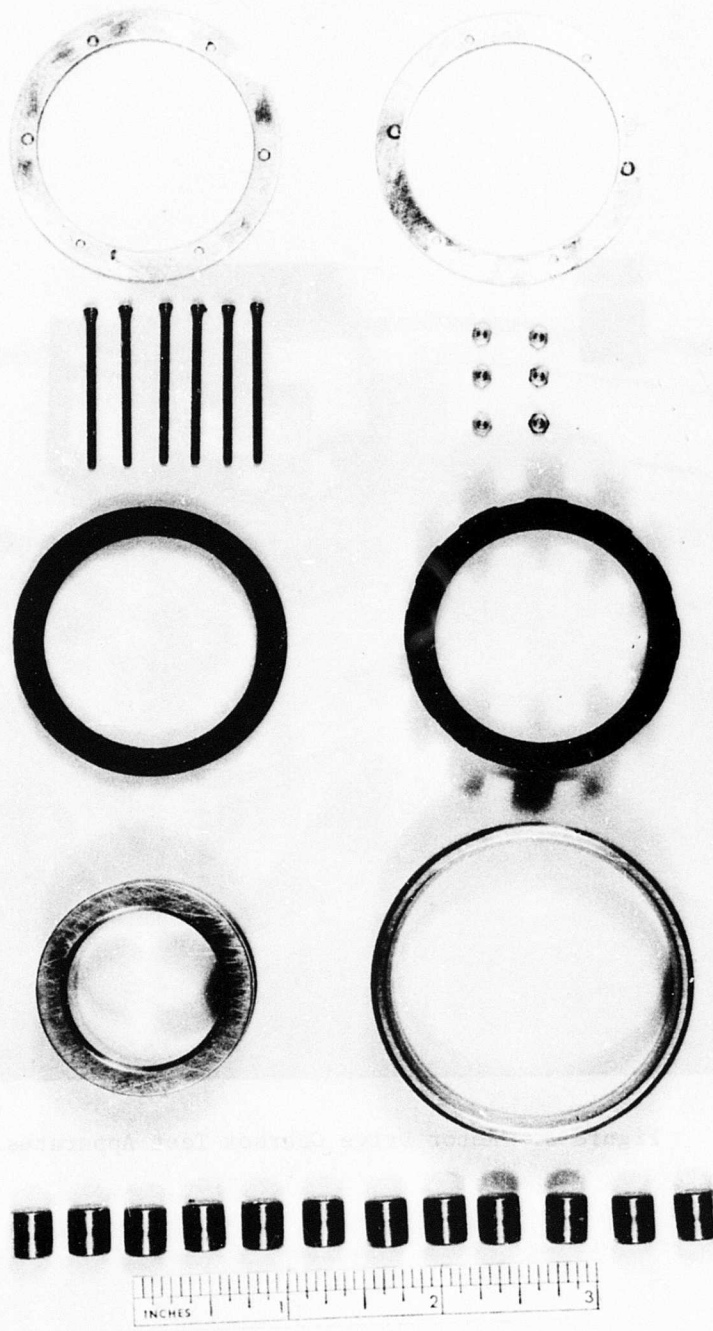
Disassembled Roller Bearing With Polyimide Retainer.
